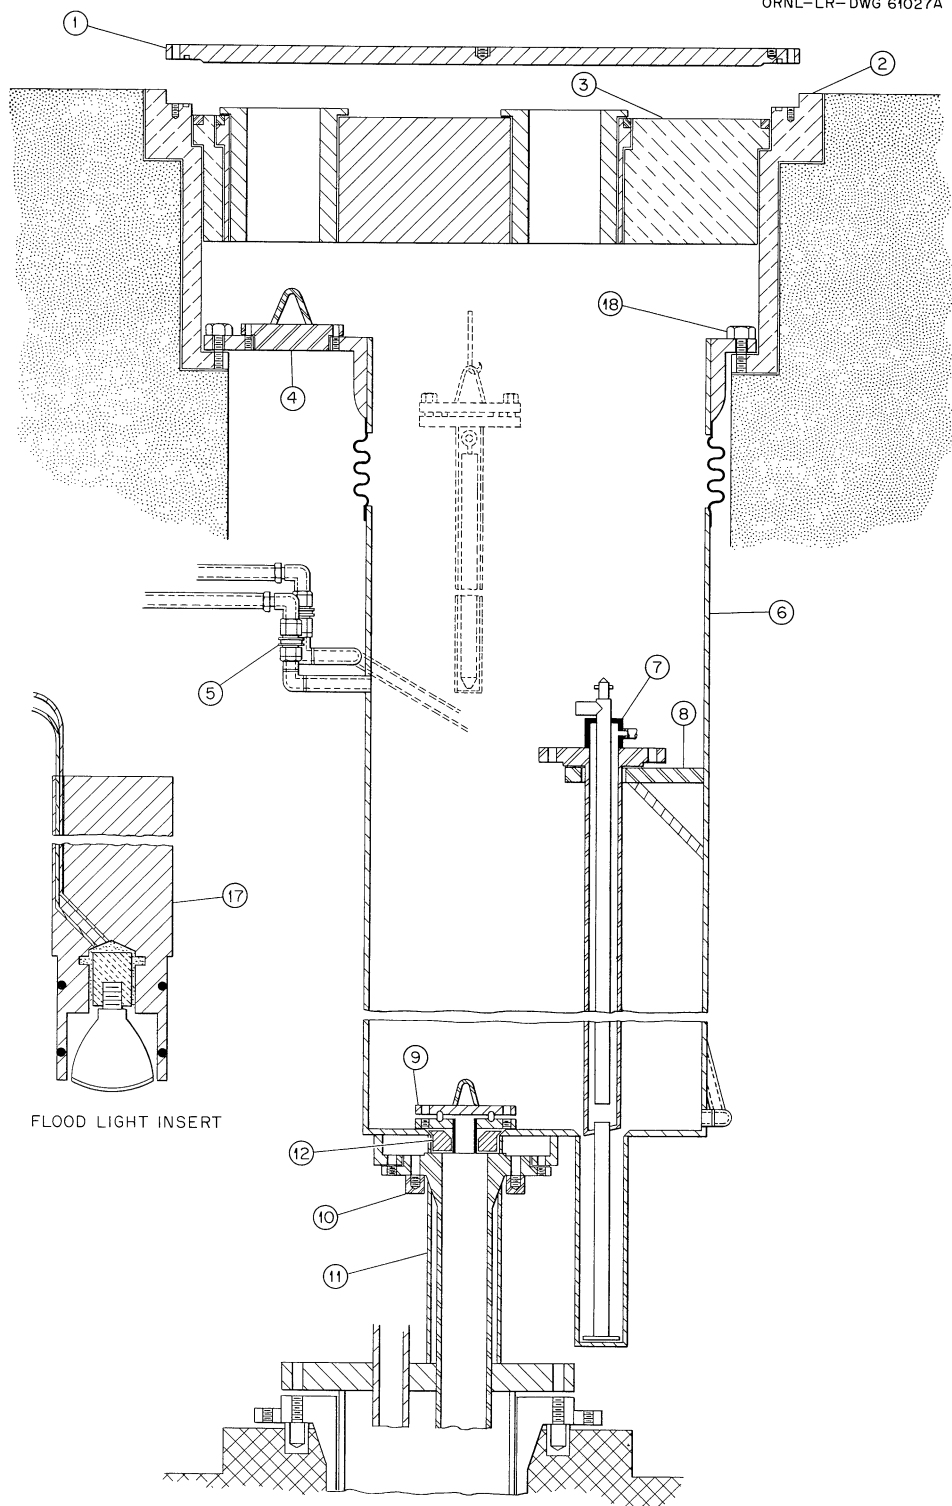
Schematic of Graphite-Sample Removal System.
